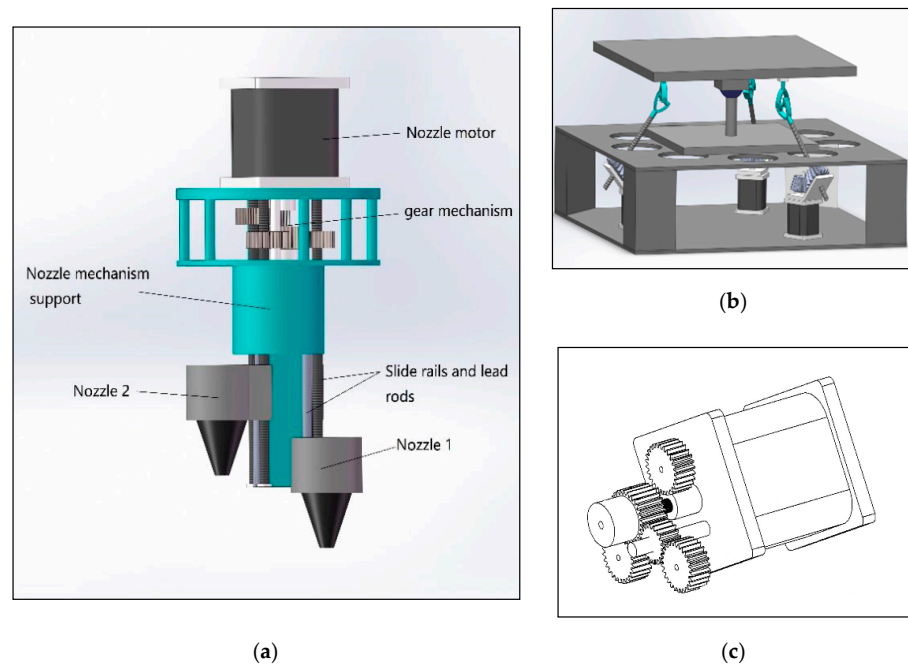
Printer nozzle mechanism. (a) Nozzle body; (b) Nozzle structure gear layout; (c) Printer platform mechanism.
